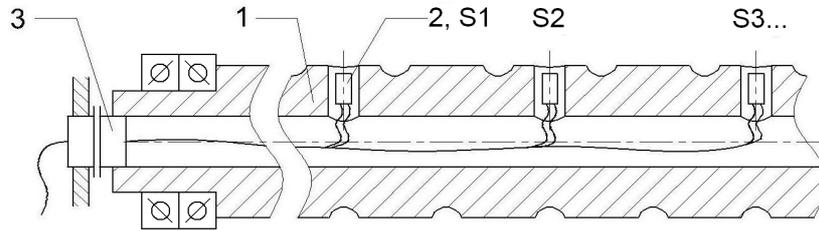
Diagram of the assembly of temperature sensors in the feed screw: 1 – the screw, 2 – temperature sensors (S1–sensor 1, S2 – sensor), 3 – electric rotary connector
